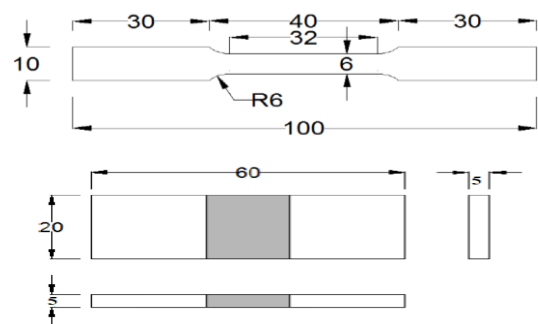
Specimen for Tensile test and Hardness Test [16]
